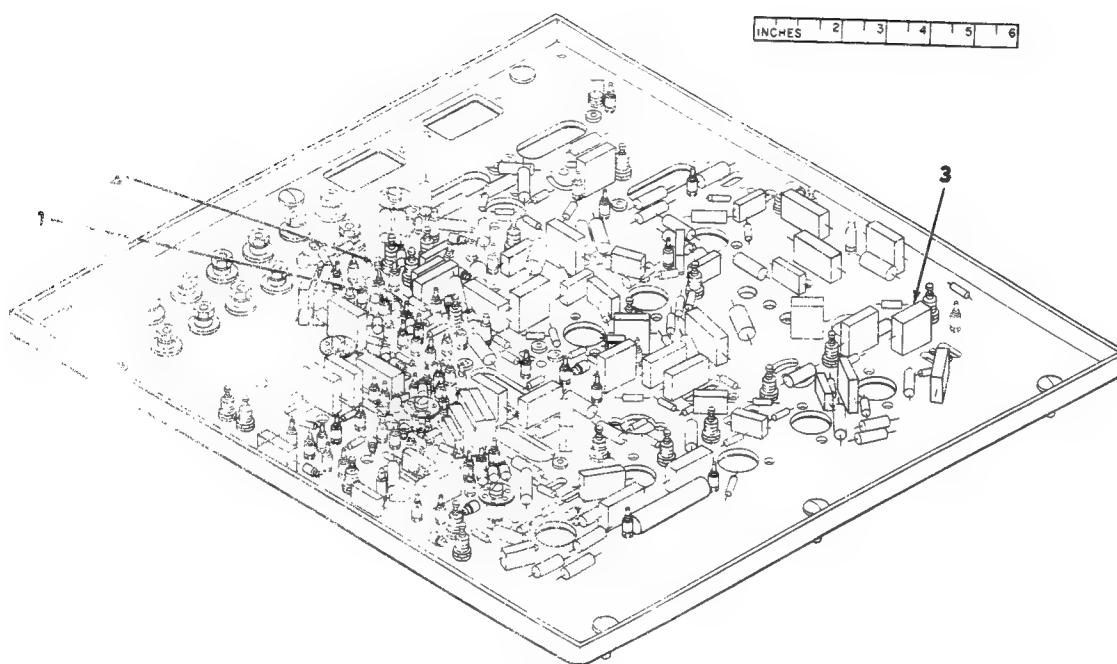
Synchronizer, electrical (9983937)—partial exploded view
